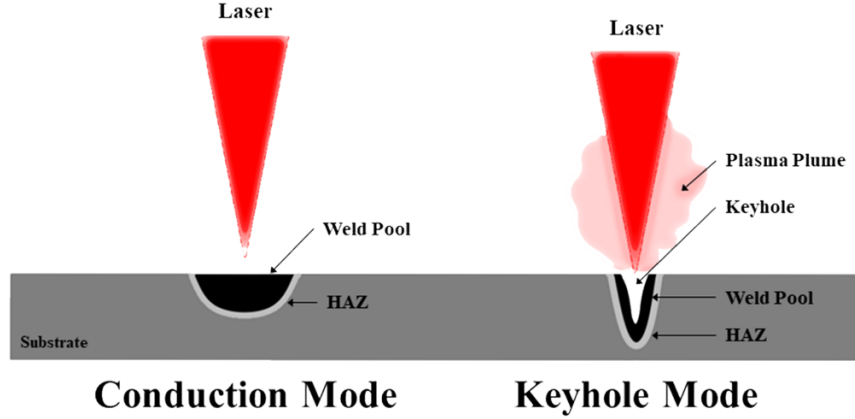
Schematic of conduction and keyhole welding modes [45].
